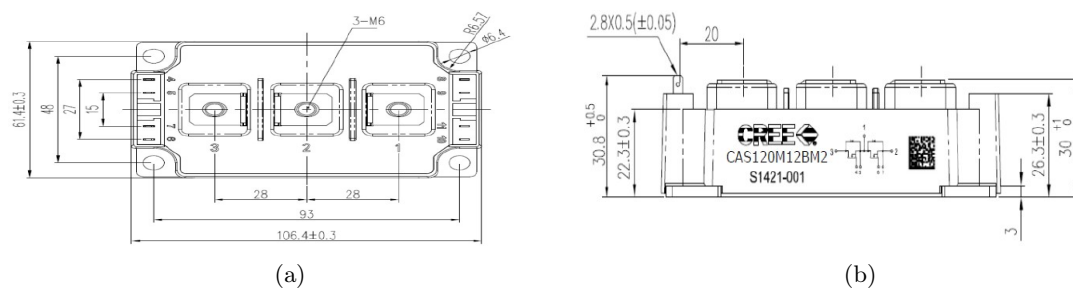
Top view dimensions (a) and side view dimensions (b) [5]
